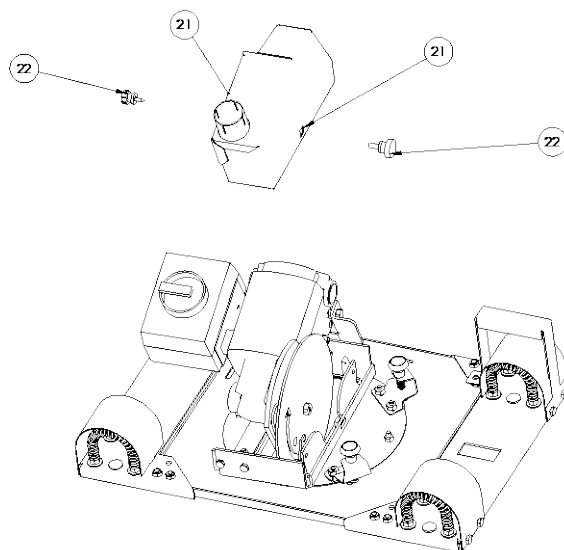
Removing/Installing the Blade Guard (Models 6400, 6800)
